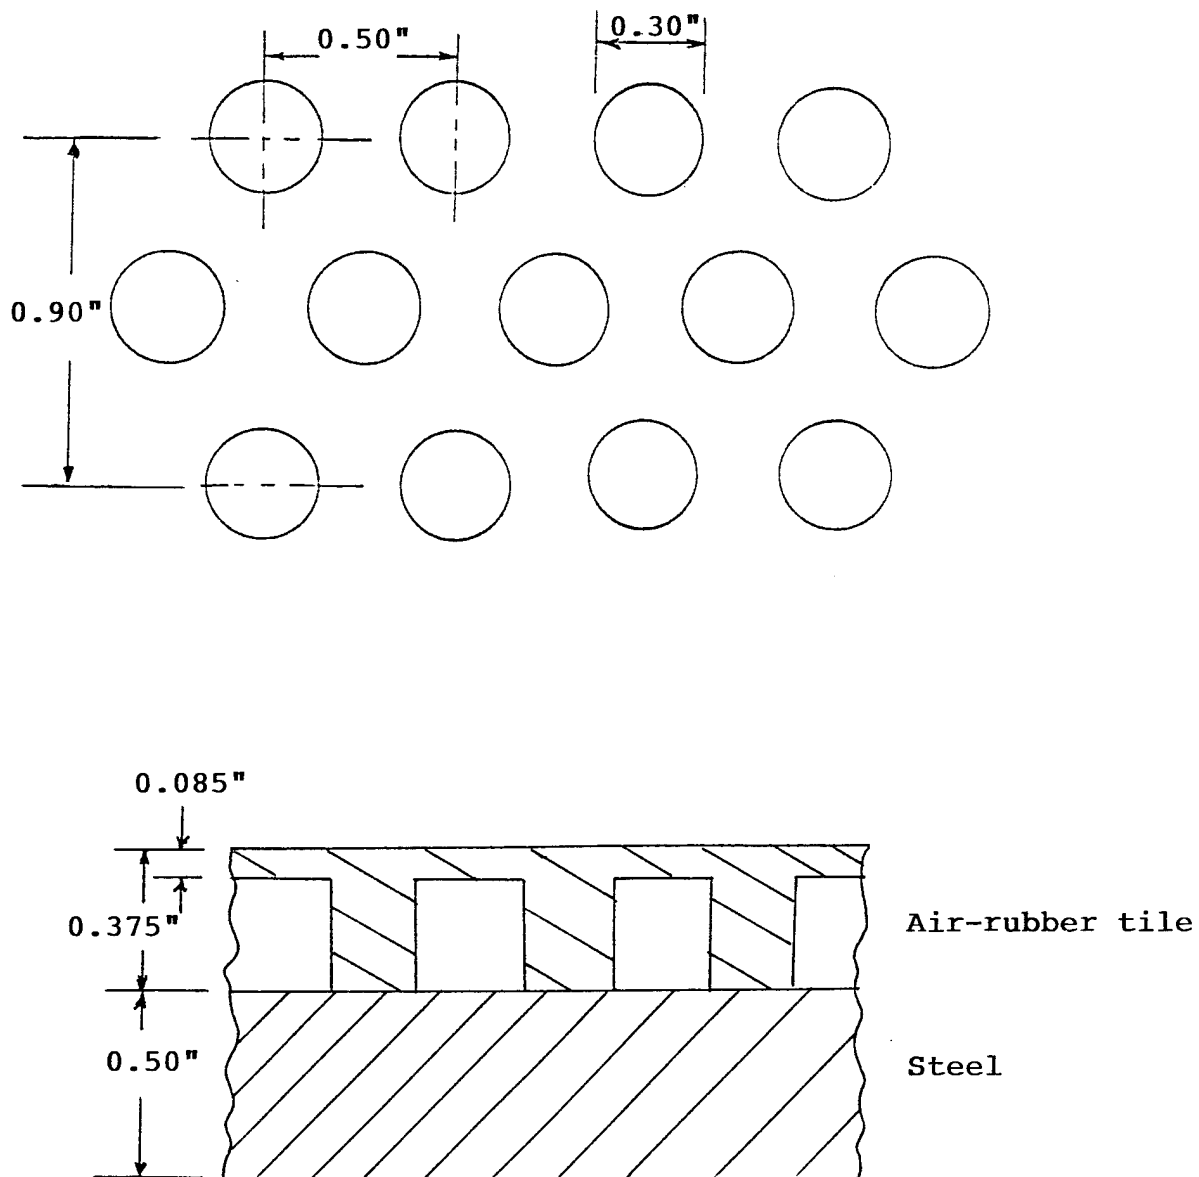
Air-rubber sample dimensions and hole pattern.
